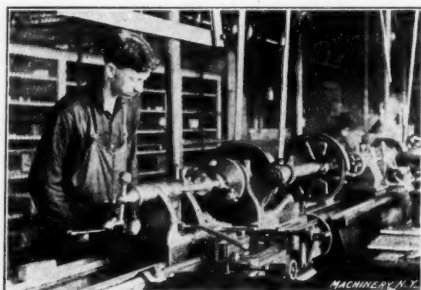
Apprentice at Work on Engine Lathe, Cincinnati Milling Machine Co.
